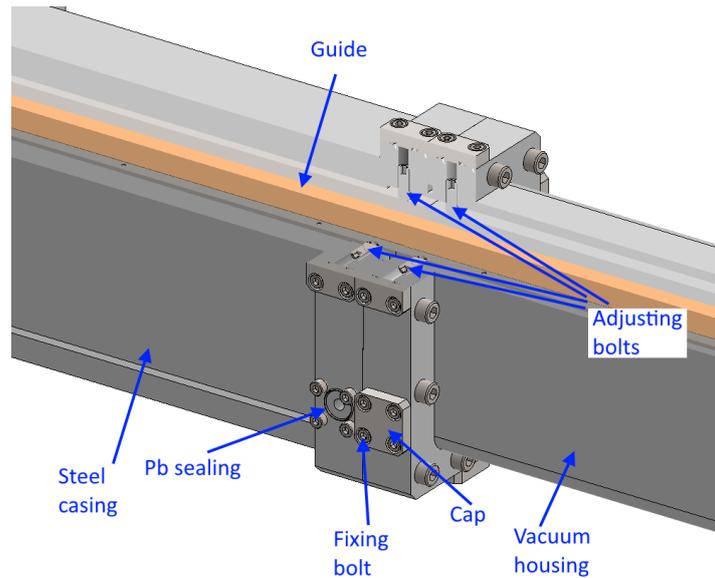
Partial section view showing a flange of W02-14 vacuum housing and its components. The Pb sealing is visible beneath a removed cap
